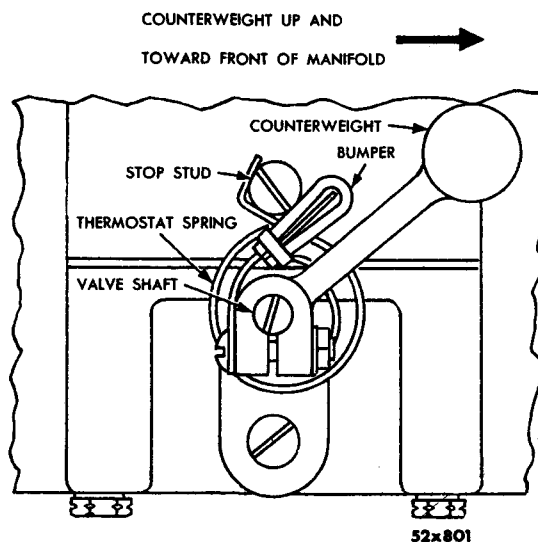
Position of Universal Manifold Heat Control Valve Counterweight for Downdraft Intake and Rear Exhaust and Updraft Intake and Front Exhaust
